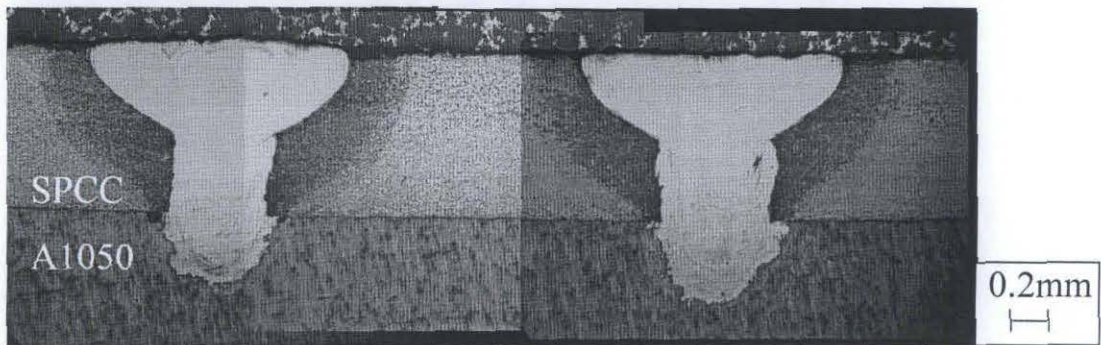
Macrostructures of the welds of SPCC/A1050.
